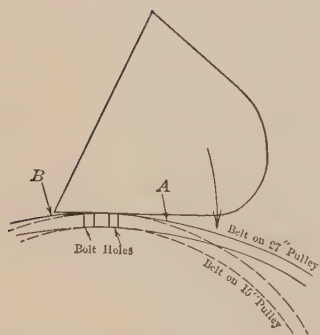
Better Support of Bucket on Foot Wheel of Large Diameter.
